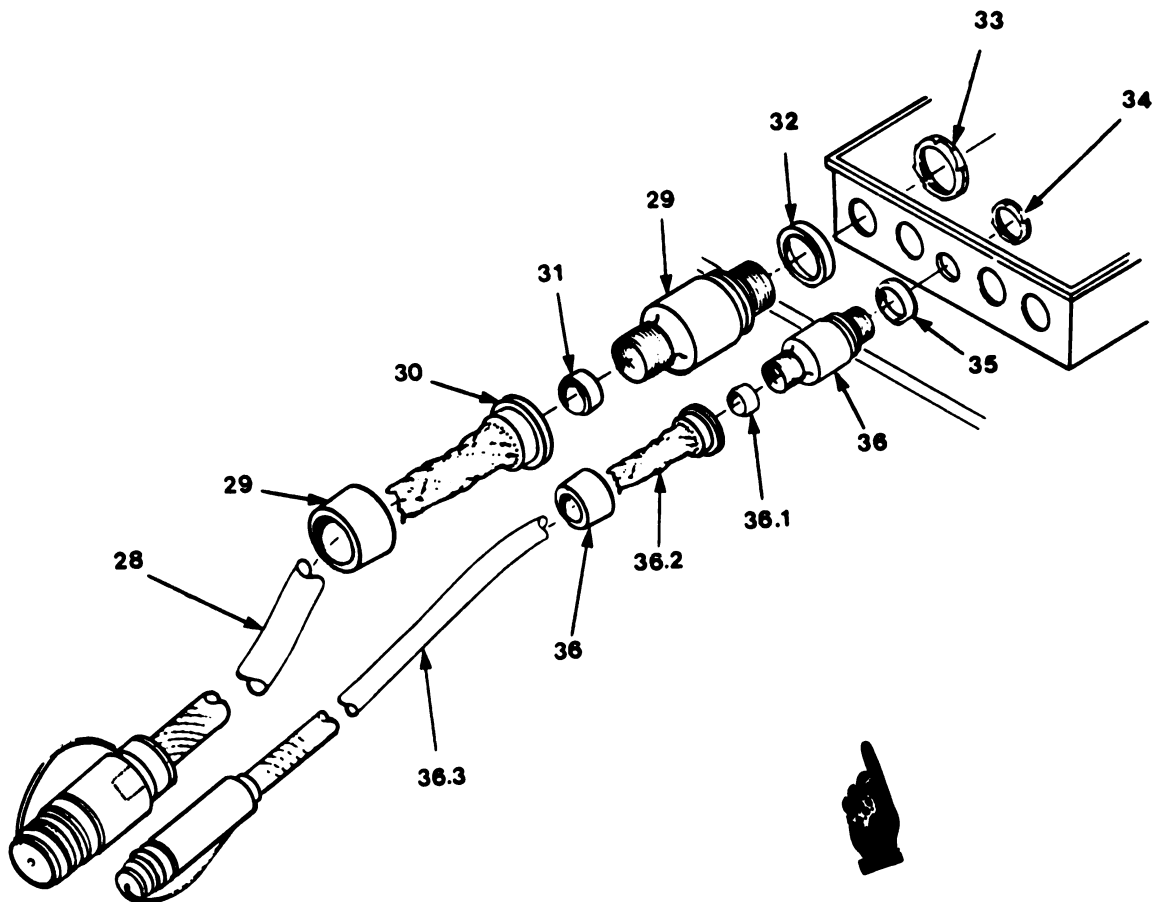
Wiring Harnesses and Cables (Sheet 2.1 of 10)
